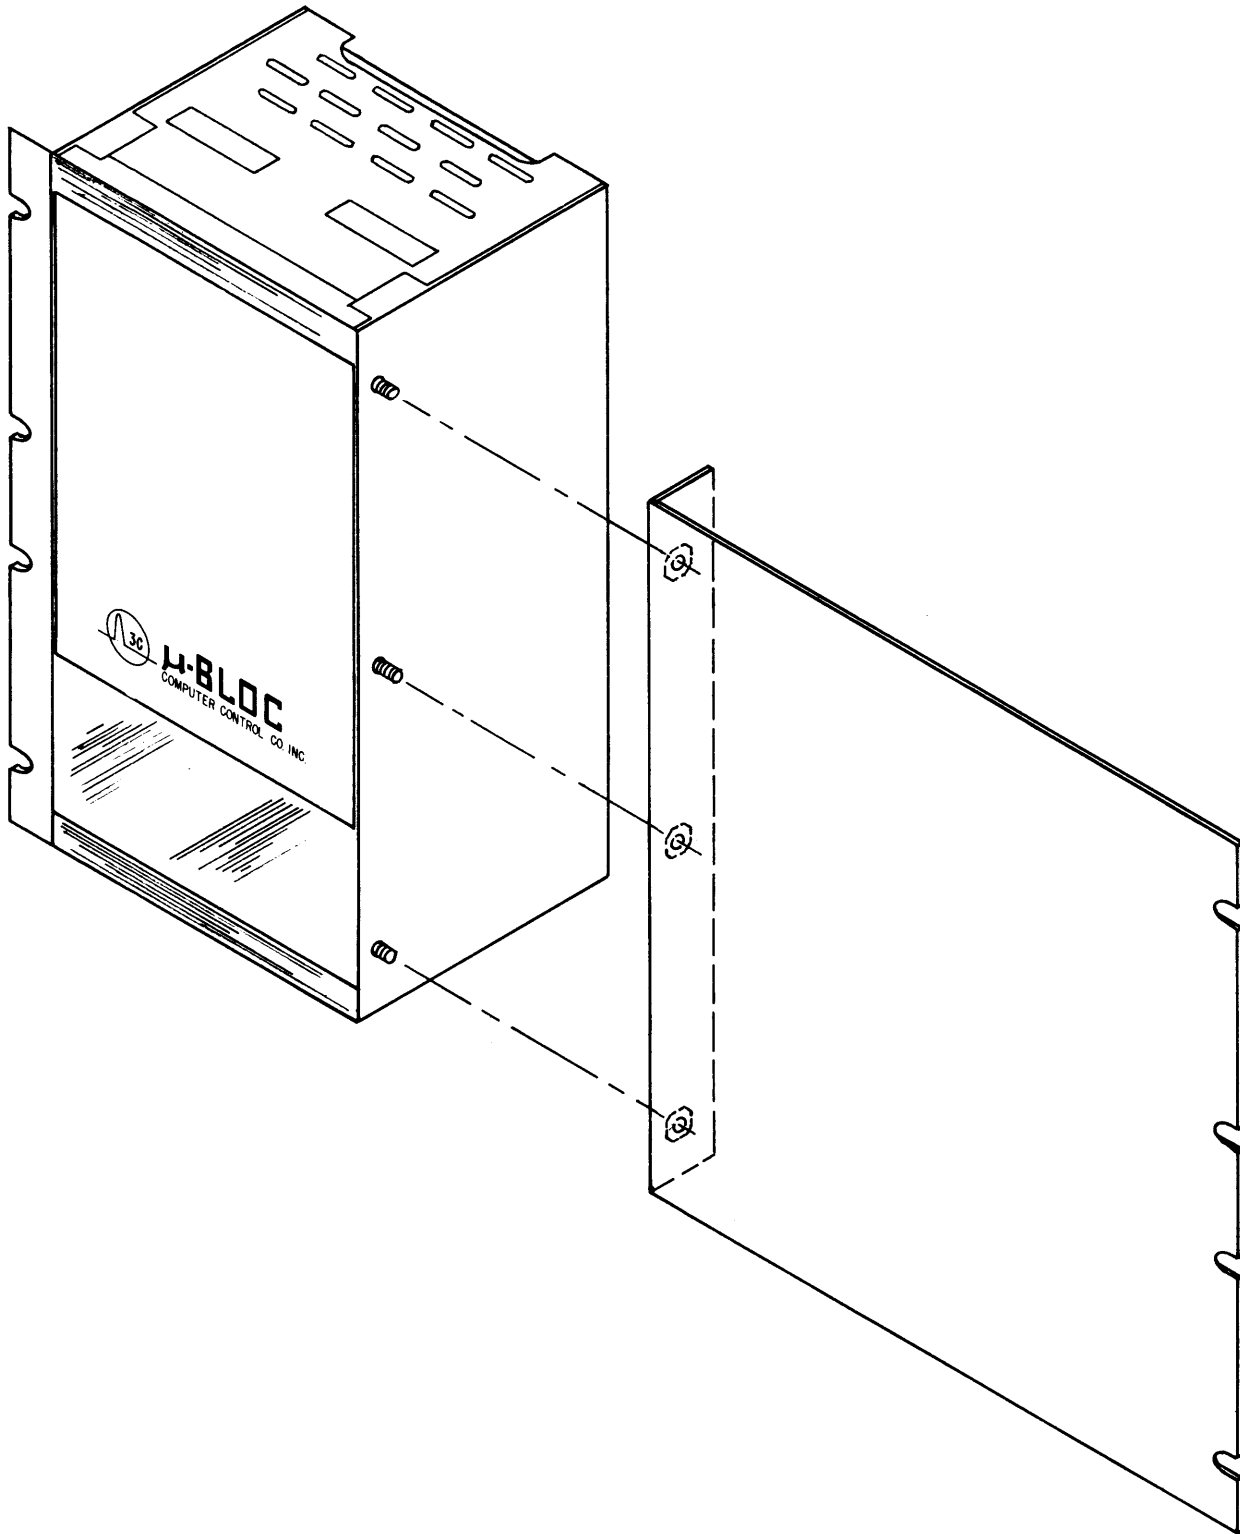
A.1  $\mu$ -BLOC and Mounting Panel Assembly
